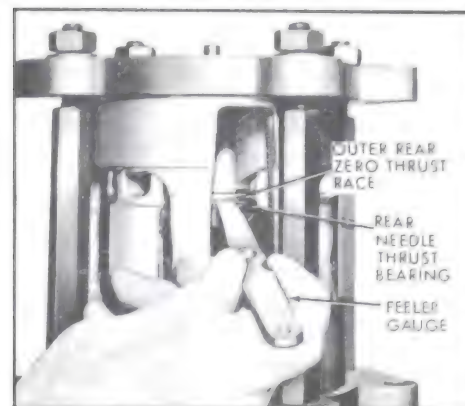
Gauging Clearance Between Rear Needle Thrust Bearing Rear Outer Race
